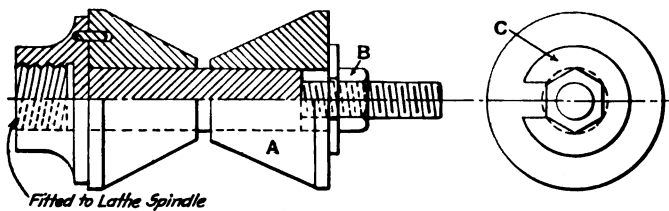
Expansion Arbor for Turning Side Rod Bushings.
